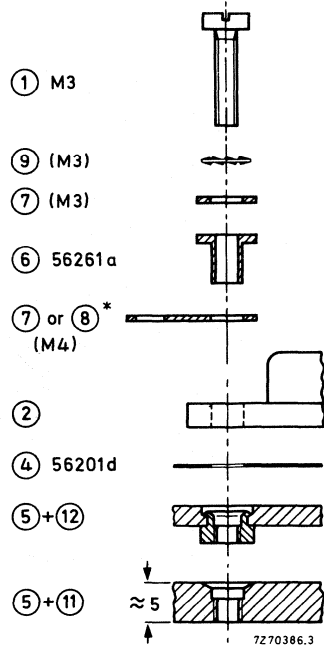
Insulated mounting (500 V) with tapped holes or insert nuts.
